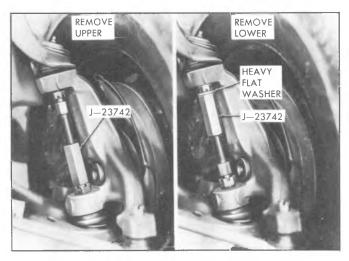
C-21-Disconnecting Ball Joints from Knuckle
